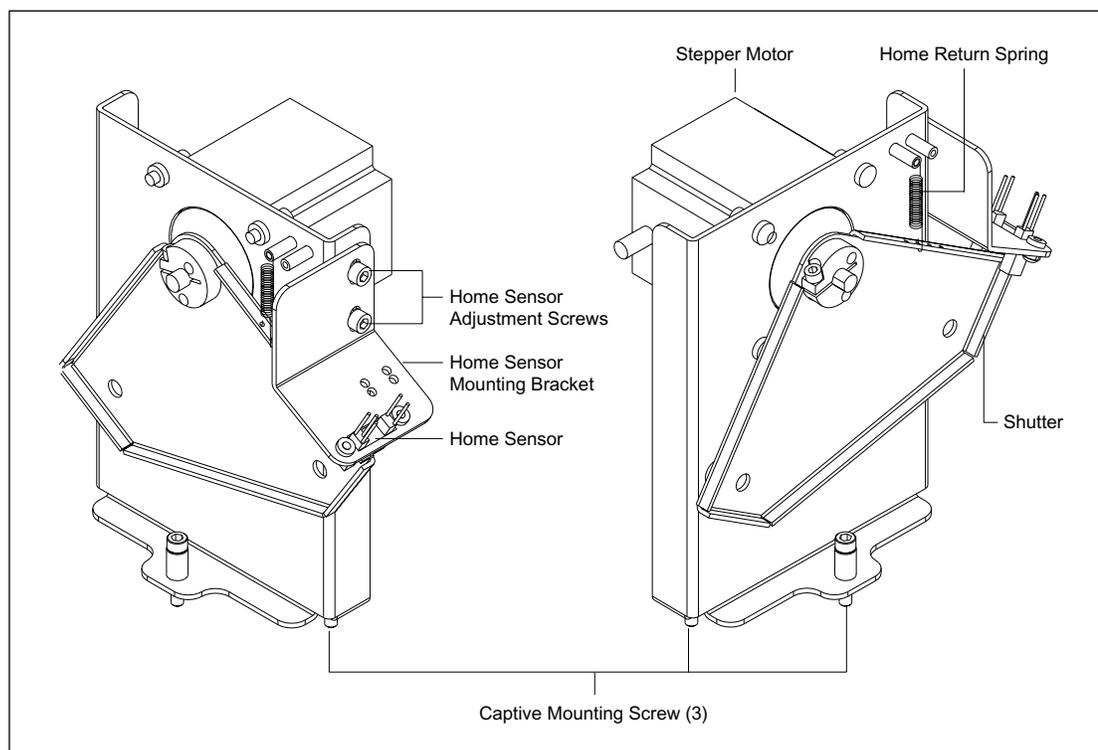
Three-Position Shutter Assembly (Sheet 1 of 2).
